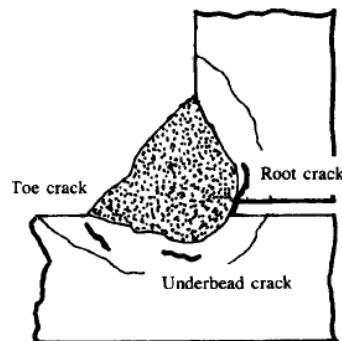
(a): Hydrogen induced cracks in HAZs of fillet welds (Bailey et al., 1973)
